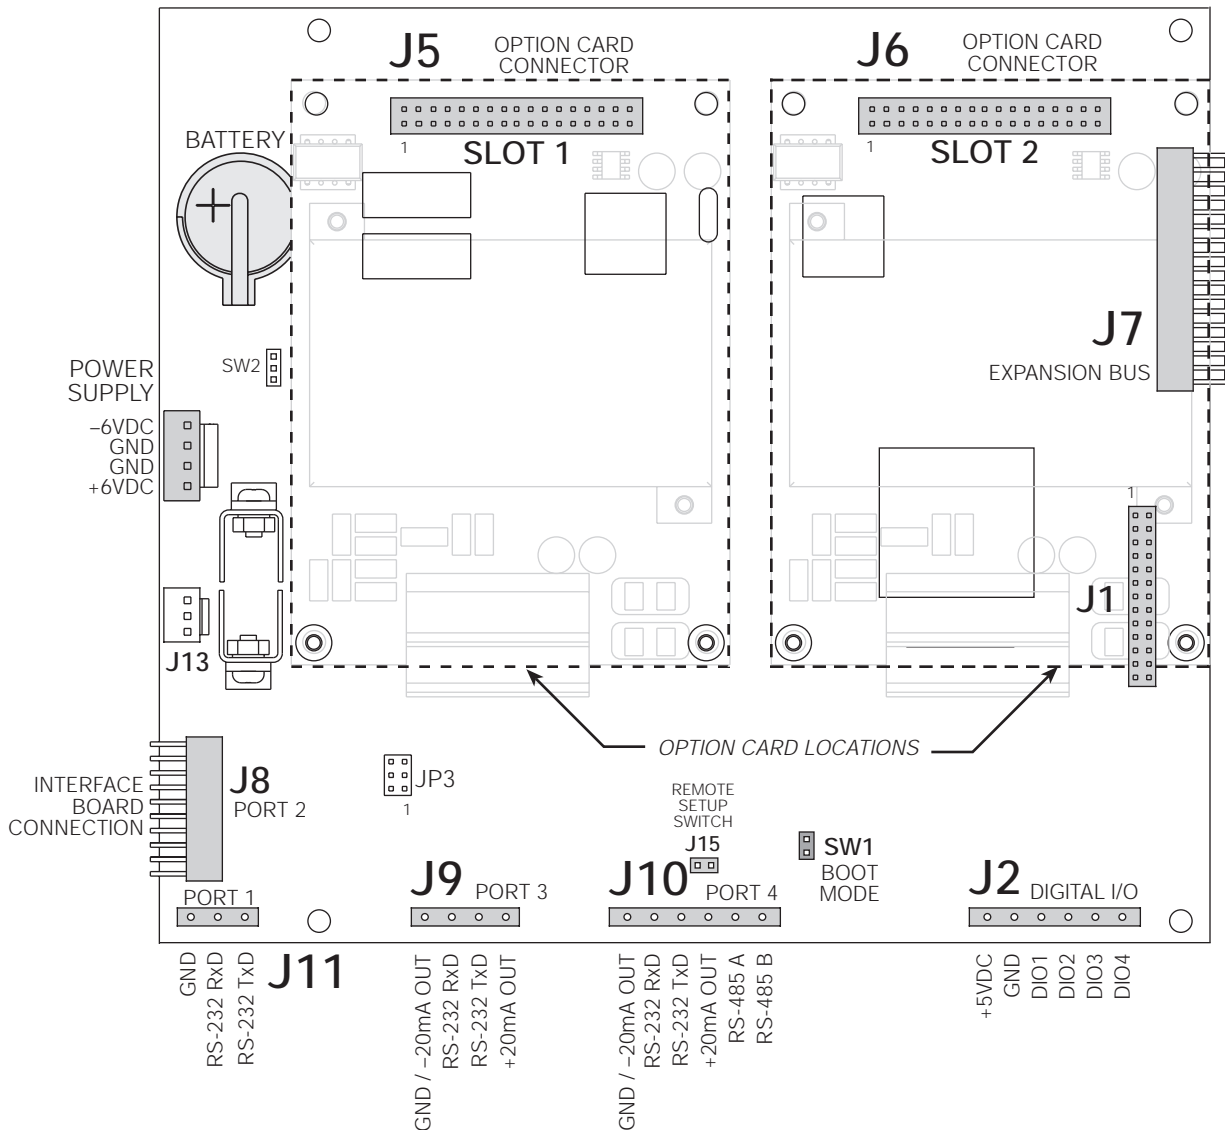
920i CPU Board, Showing Option Card Locations
